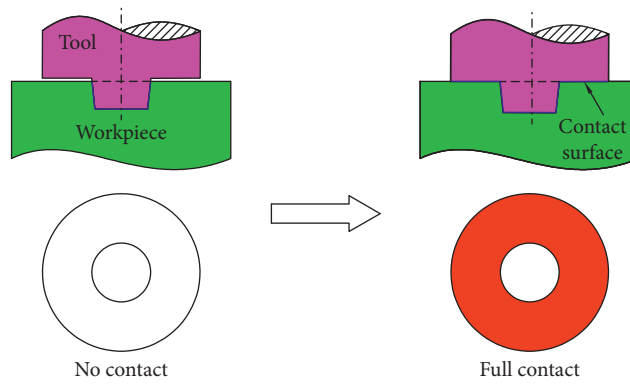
Contact conditions between the shoulder and workpiece in the shoulder-plunging stage at different steps in the CAM.
